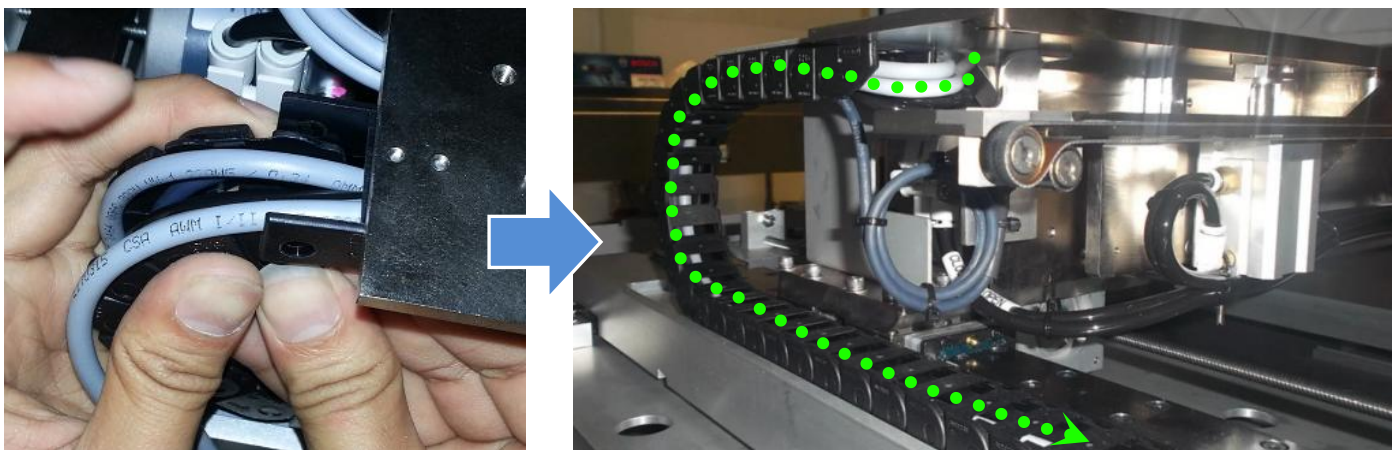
Stepper Motor Cable Routing (AWA E-Chain)
